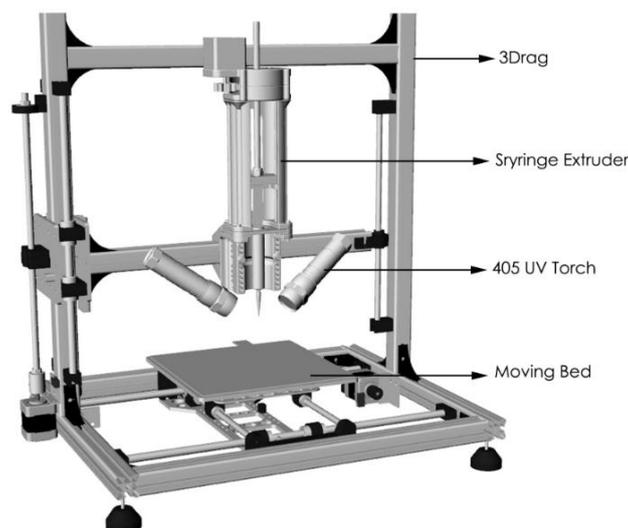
Schematic representation of the 3D printer equipped with UV-torches used in this work.
